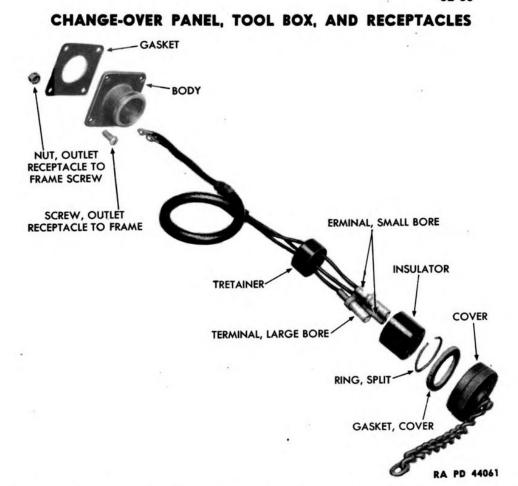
3-pole Outlet Receptacle Assembly — Exploded View
